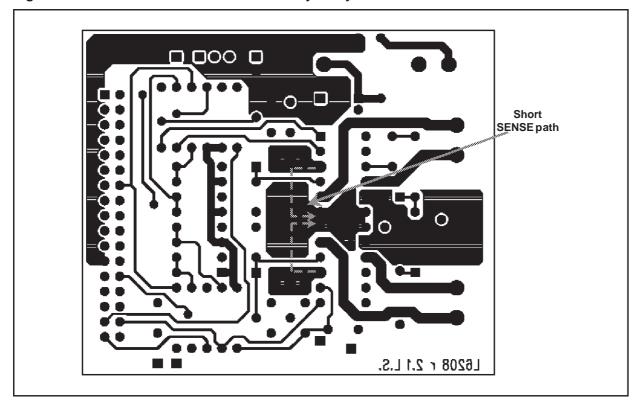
L6208 Evaluation Board Bottom Layer Layout.
